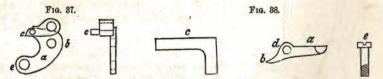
Bridle, half size, two views. a, body; b, eye for tumbler-pivot; c, pivot; d, hole for bridle-screw; e, hole for sear-screw.
